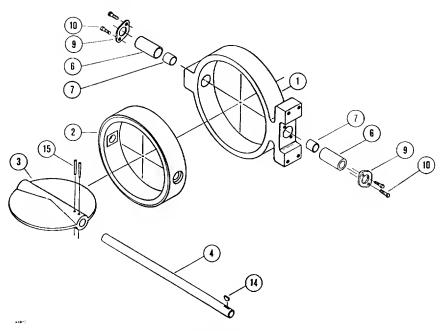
Uncoated Disc Construction with Keyed Valve Shaft
